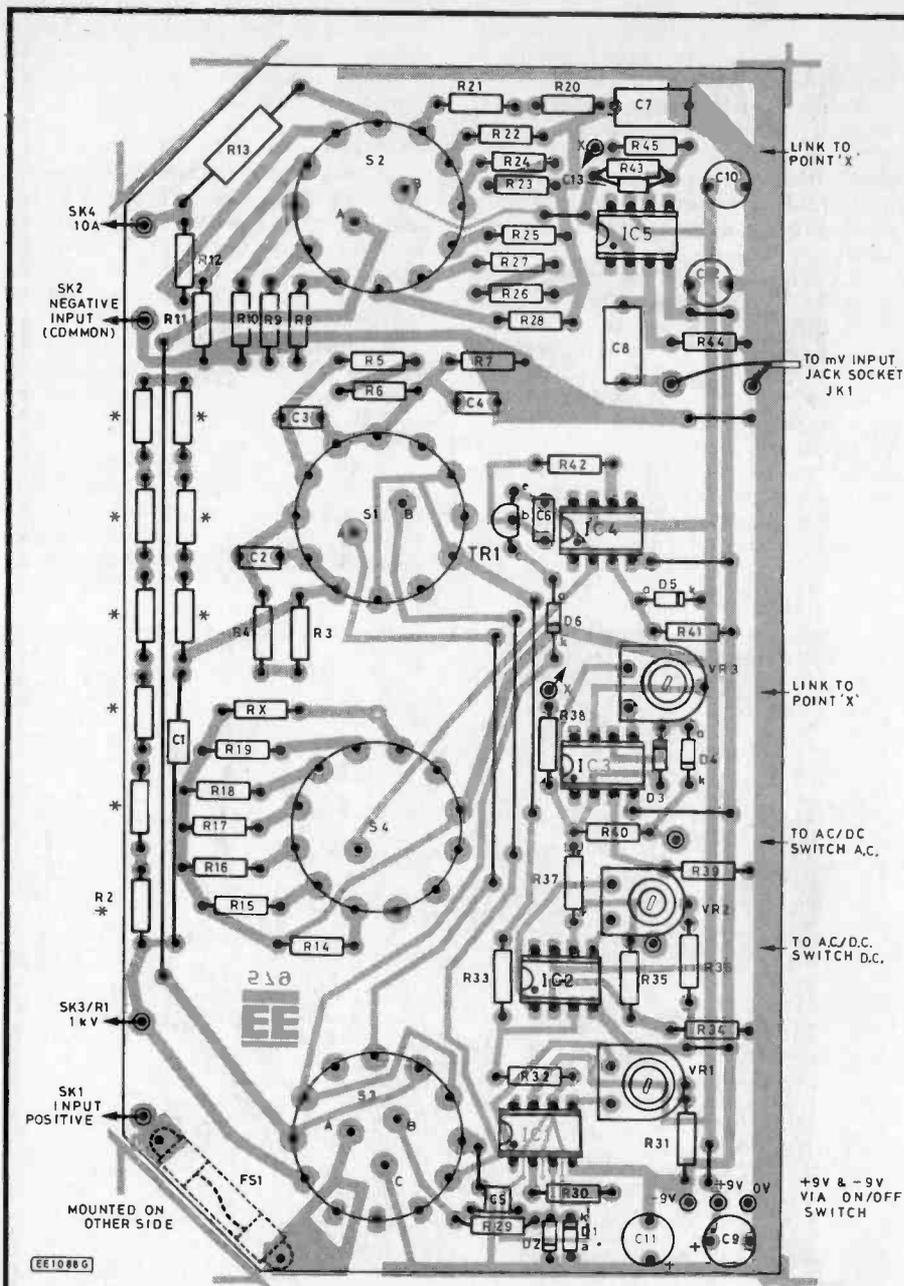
Component layout on the printed circuit board. Note that the long link wires should be made with plastic insulated connecting wire, see photographs.
